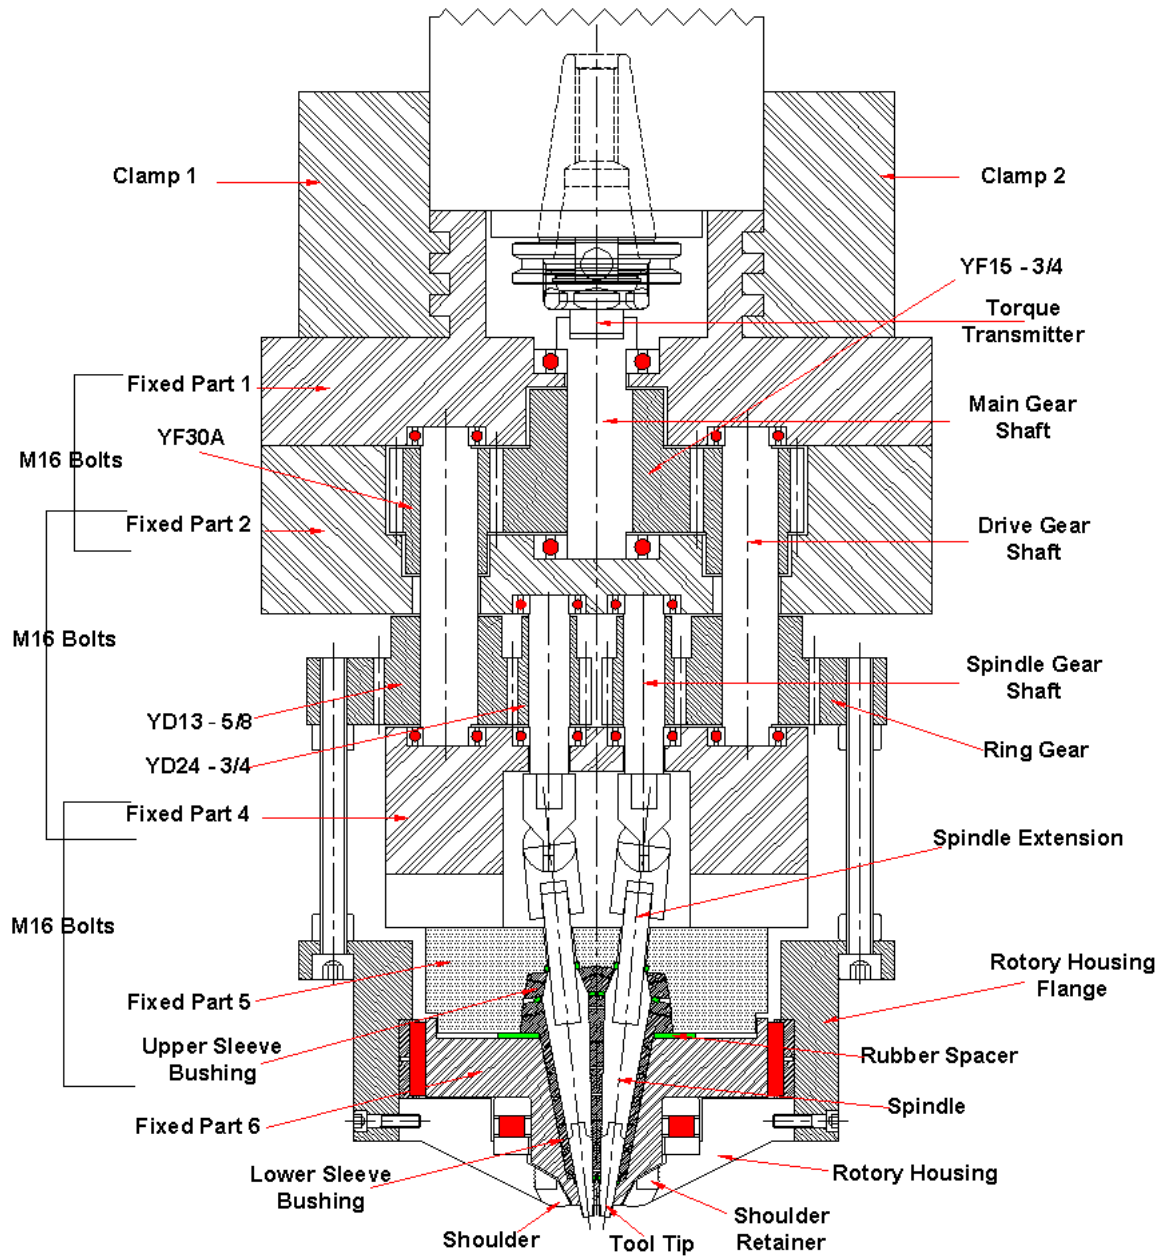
Design of the friction driven stitch welding apparatus.
